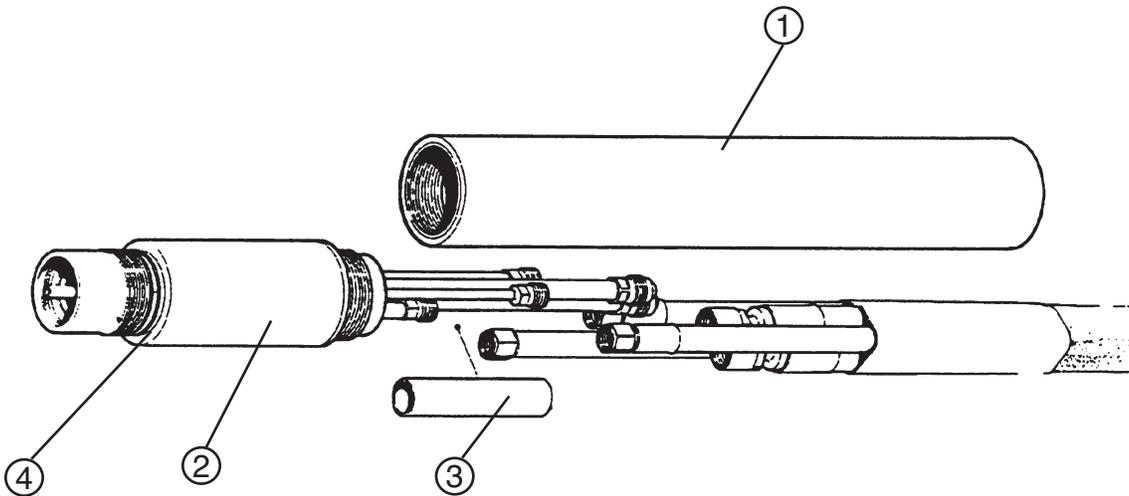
MAX200 Machine Torch Assembly (Optional)
